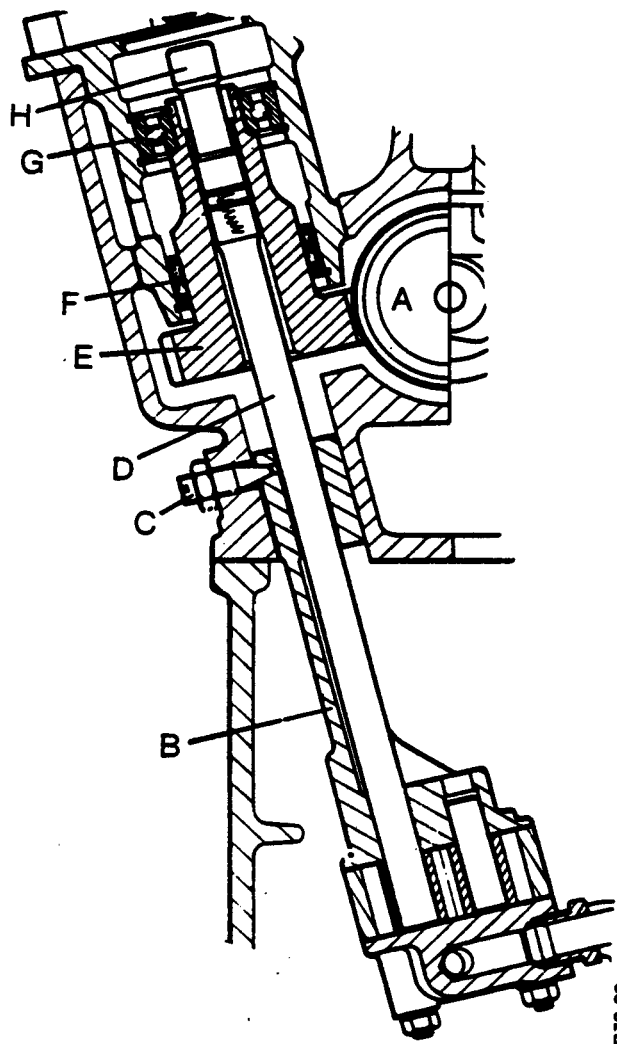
NEEDLE ROLLER BEARING TOOL
